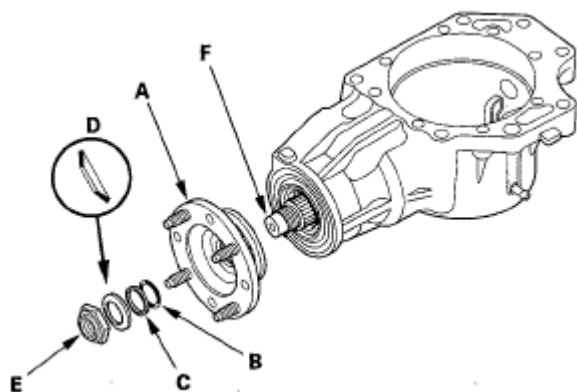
Identifying Companion Flange And Transfer Output Shaft (Hypoid Gear)
